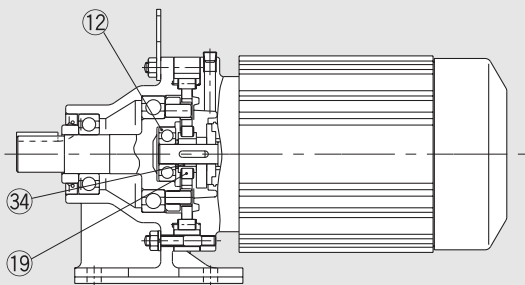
Type CNHM (Horizontal-Gearmotor)
